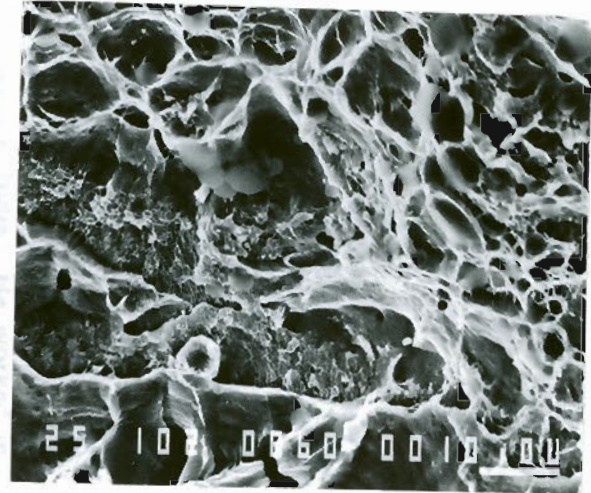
Fractured surfaces of half size CVN impact specimens for A572 steel, flame cut at slower cutting speed.
